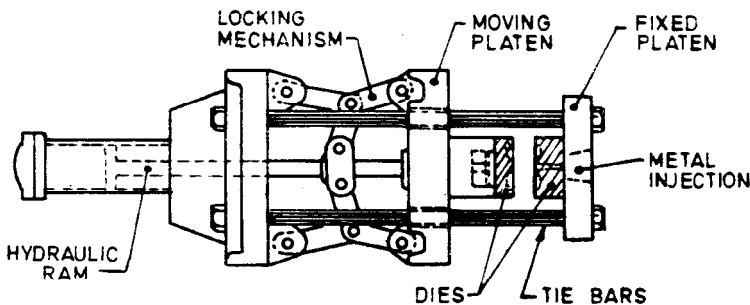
BASIC PRINCIPLE OF PRESSURE DIE CASTING MACHINE
